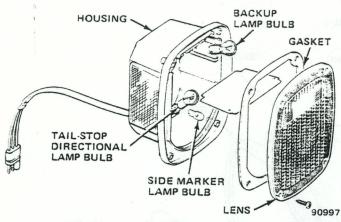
R-7 Rear Directional. Stop, Backup, Taillamps and Side Marker Lamps—CJ and Sport Truck Models
